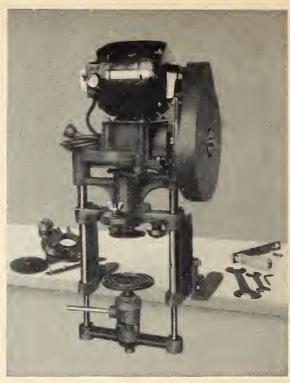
Heavy-duty bench-type motor-driven sealers.
